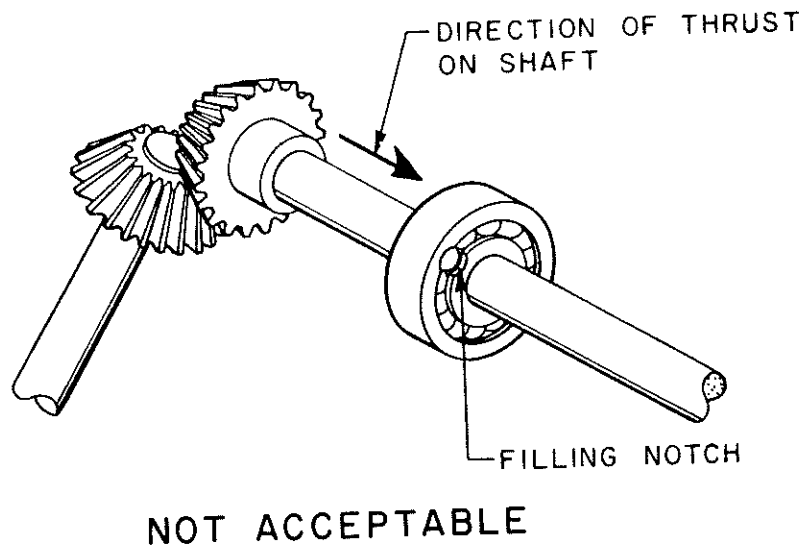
Improper Application of Ball Bearing with Filling Notches
